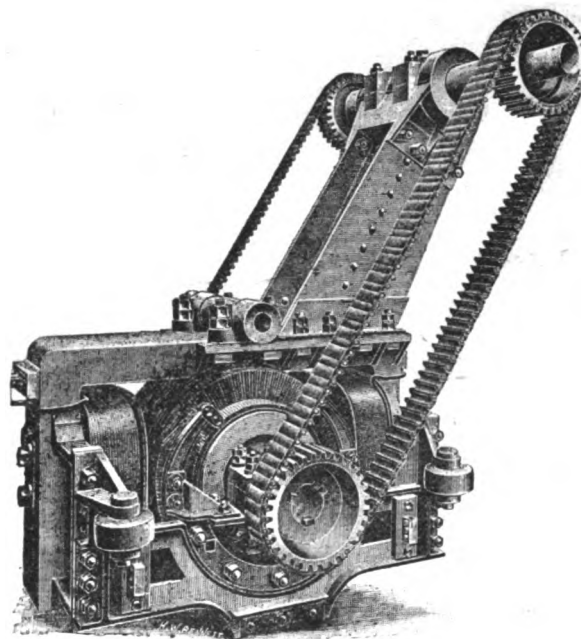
THE BEHR MONORAIL SYSTEM. MOTOR GEAR.
